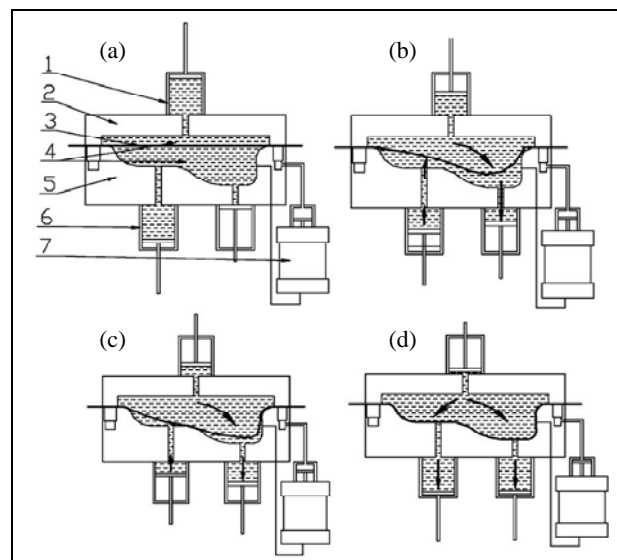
A schematic diagram of VPF [2]: (1) medium injection cylinder; (2) upper die; (3) blank sheet; (4) viscous medium; (5) die; (6) medium outlet cylinder; (7) blank holder cylinder.
